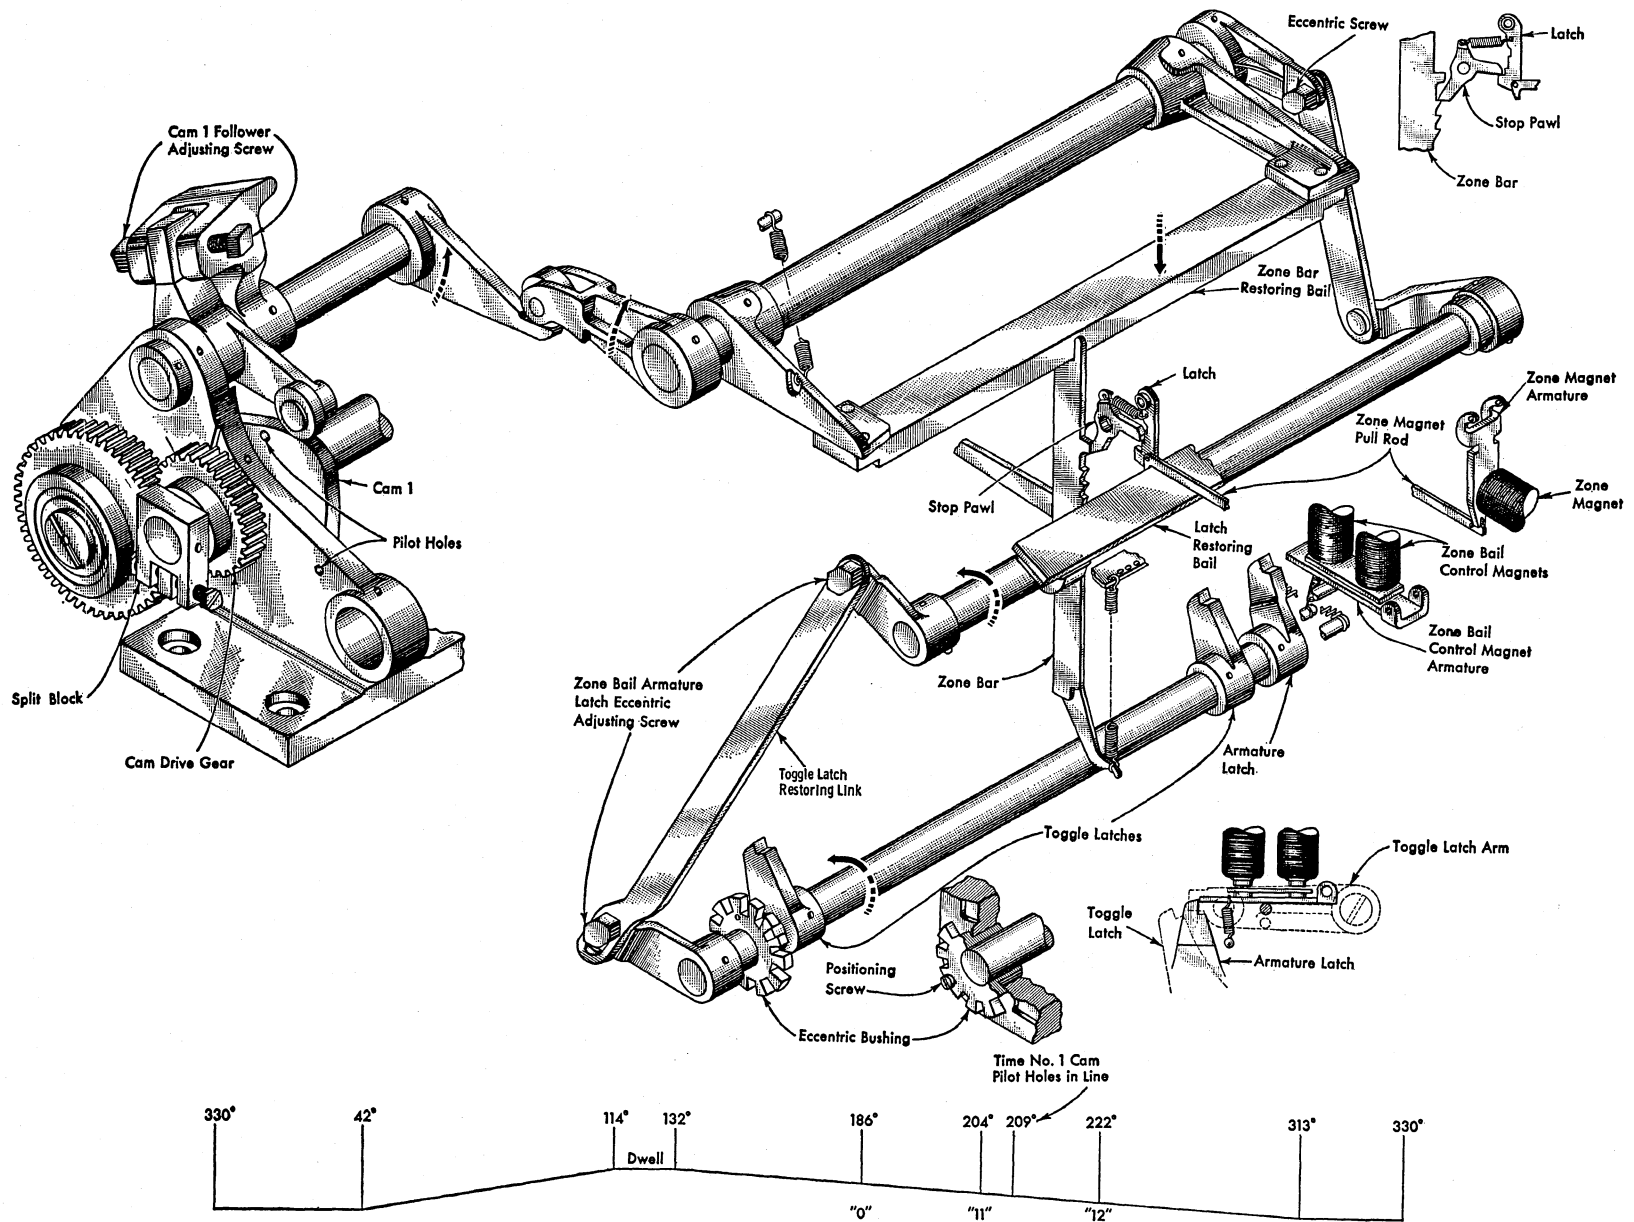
Zone Control Drive Unit, Cam 1 Mechanism
